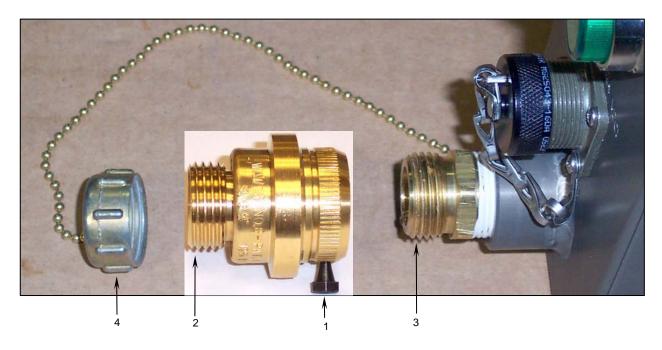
Installing the New Sink Fill Pump Assembly Vacuum Breaker.
